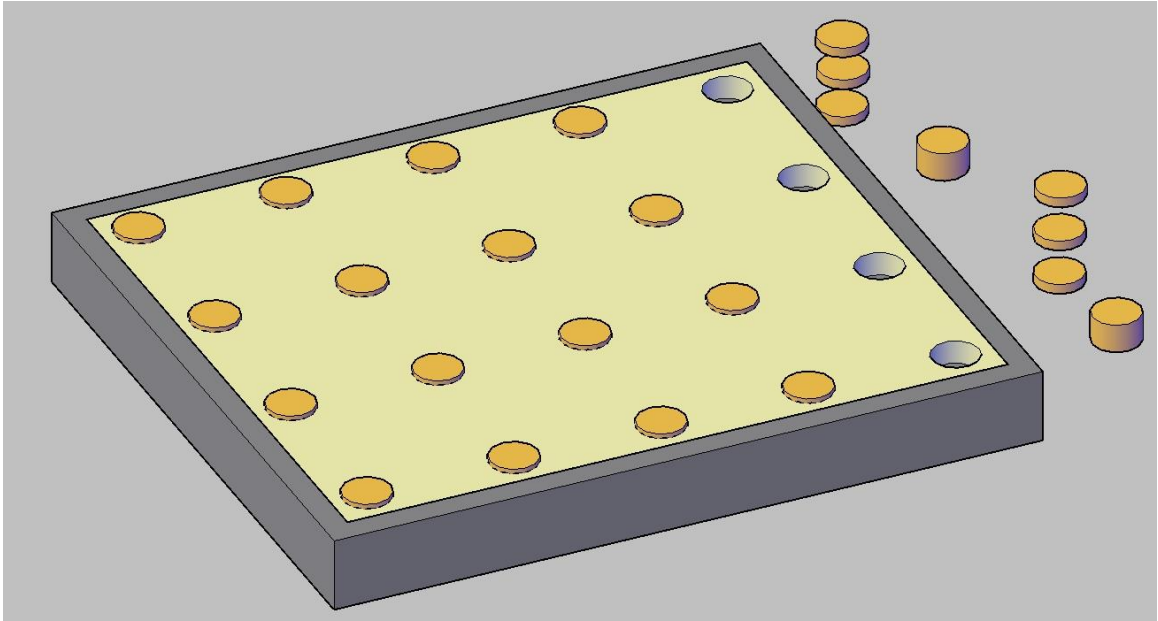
Chart. Three dimensional view of the Assembly Design III.
